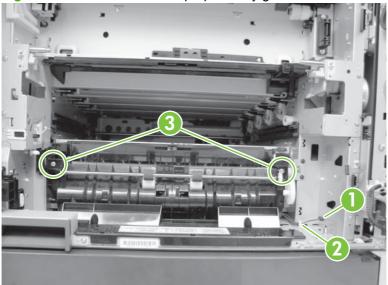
Remove the multipurpose drive unit (7 of 7)
